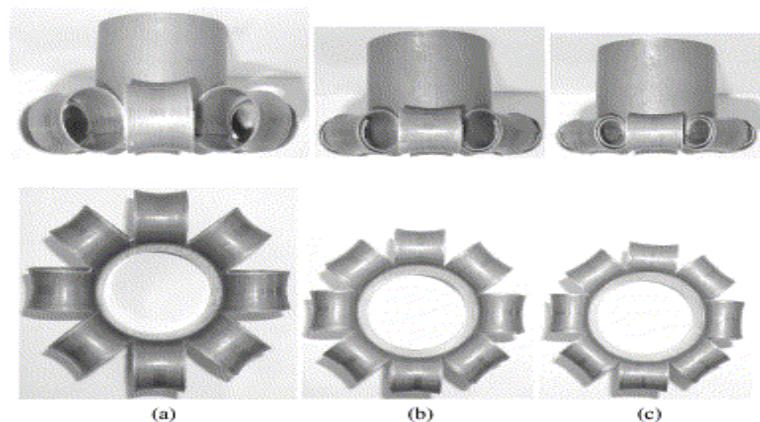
Typical mild steel specimens in their final deformed stages [71].
